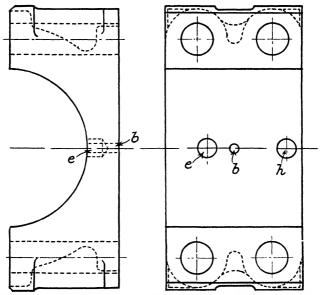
BEARING CUP FOR REAR BEARING, (No. 7) OF A.E.C. ENGINE
